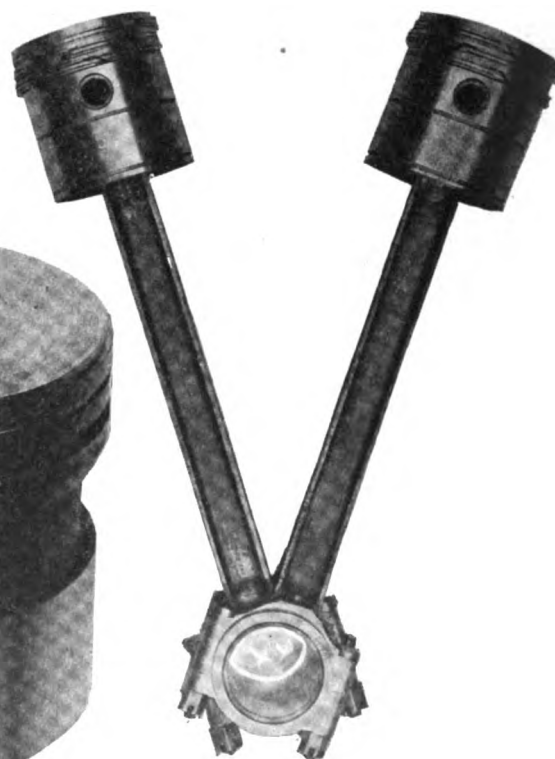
Standard piston and connecting rod on Cadillac eight engine
